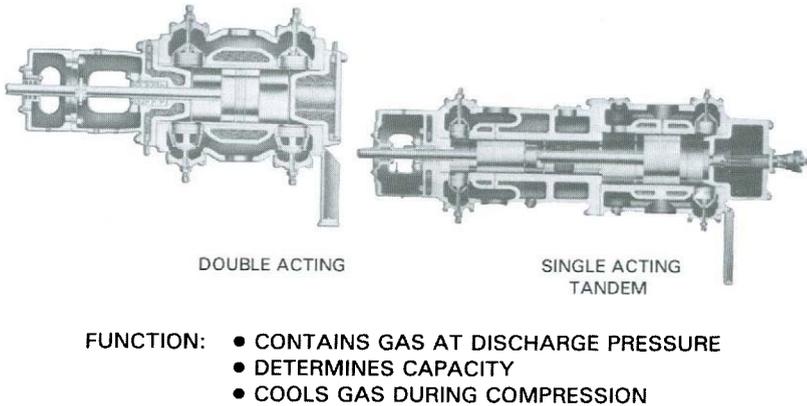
Cylinder and liner (Courtesy of Dresser Rand)
